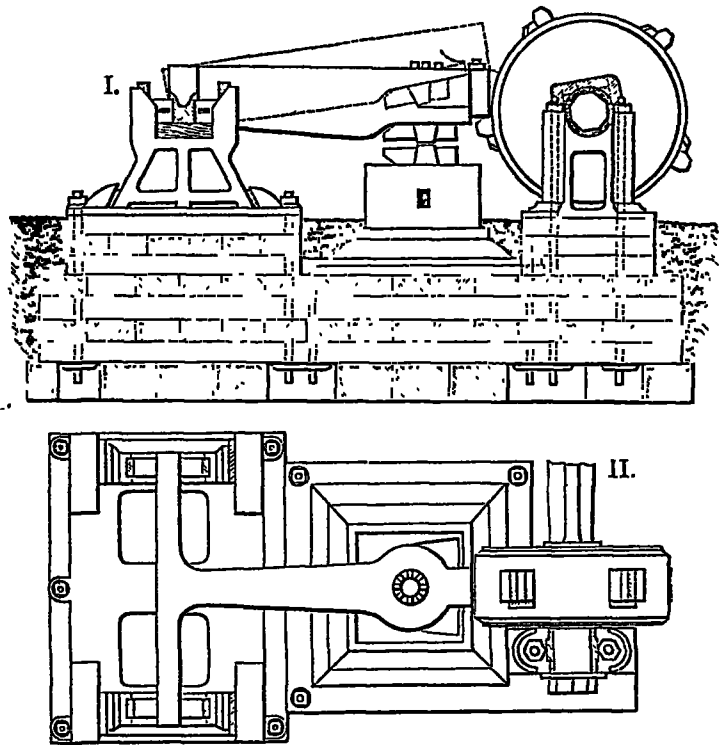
Helve Hammer. I. Elevation. II. Plan.
